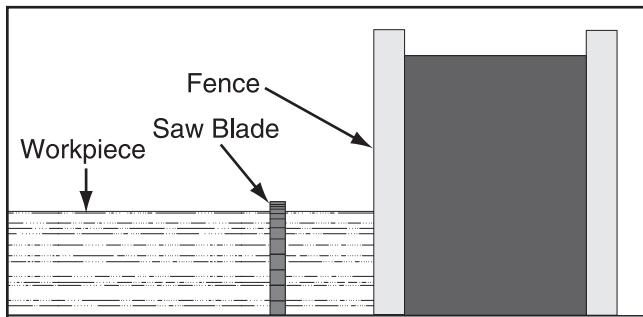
Example of a through cut (blade guard not shown for illustrative purposes).
